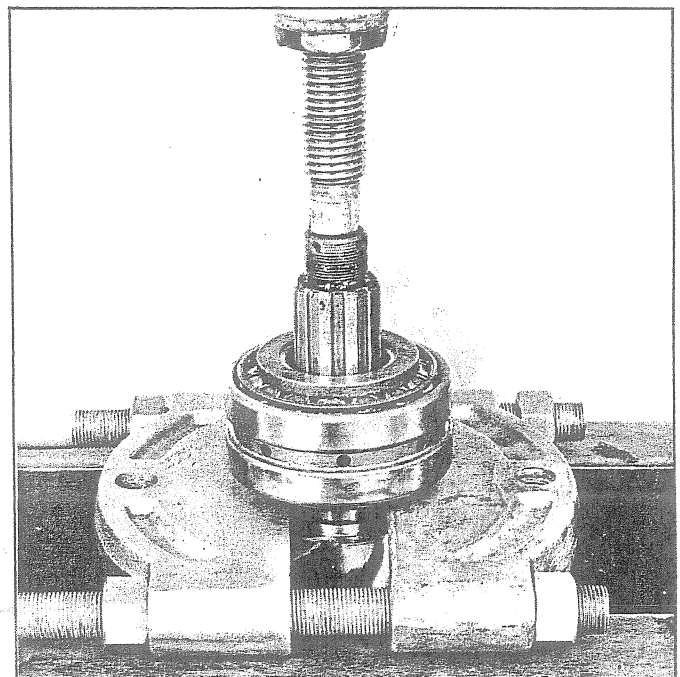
Pressing Pinion Shaft from Outer Bearing
